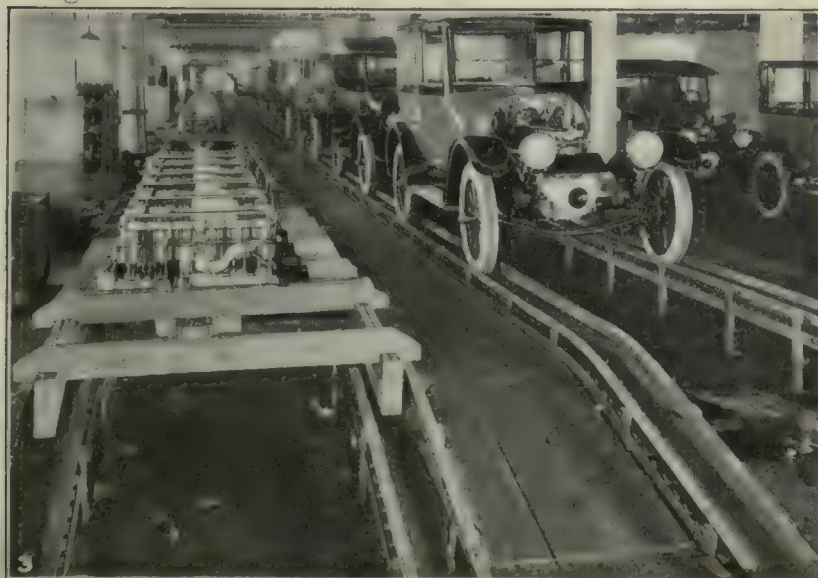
ELEVATED ASSEMBLING TRACKS. FIG. 4—REO SPEED WAGON ASSEMBLY
